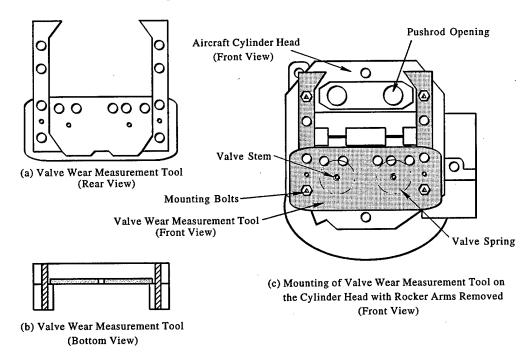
VALVE WEAR MEASUREMENT TOOL AND MOUNTING
